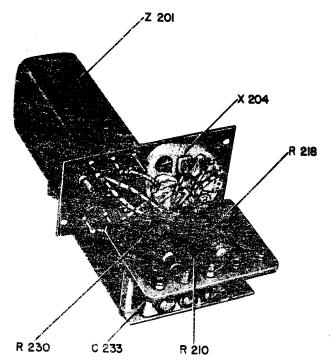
Receiver 1st I-F Assembly - Bottom View
